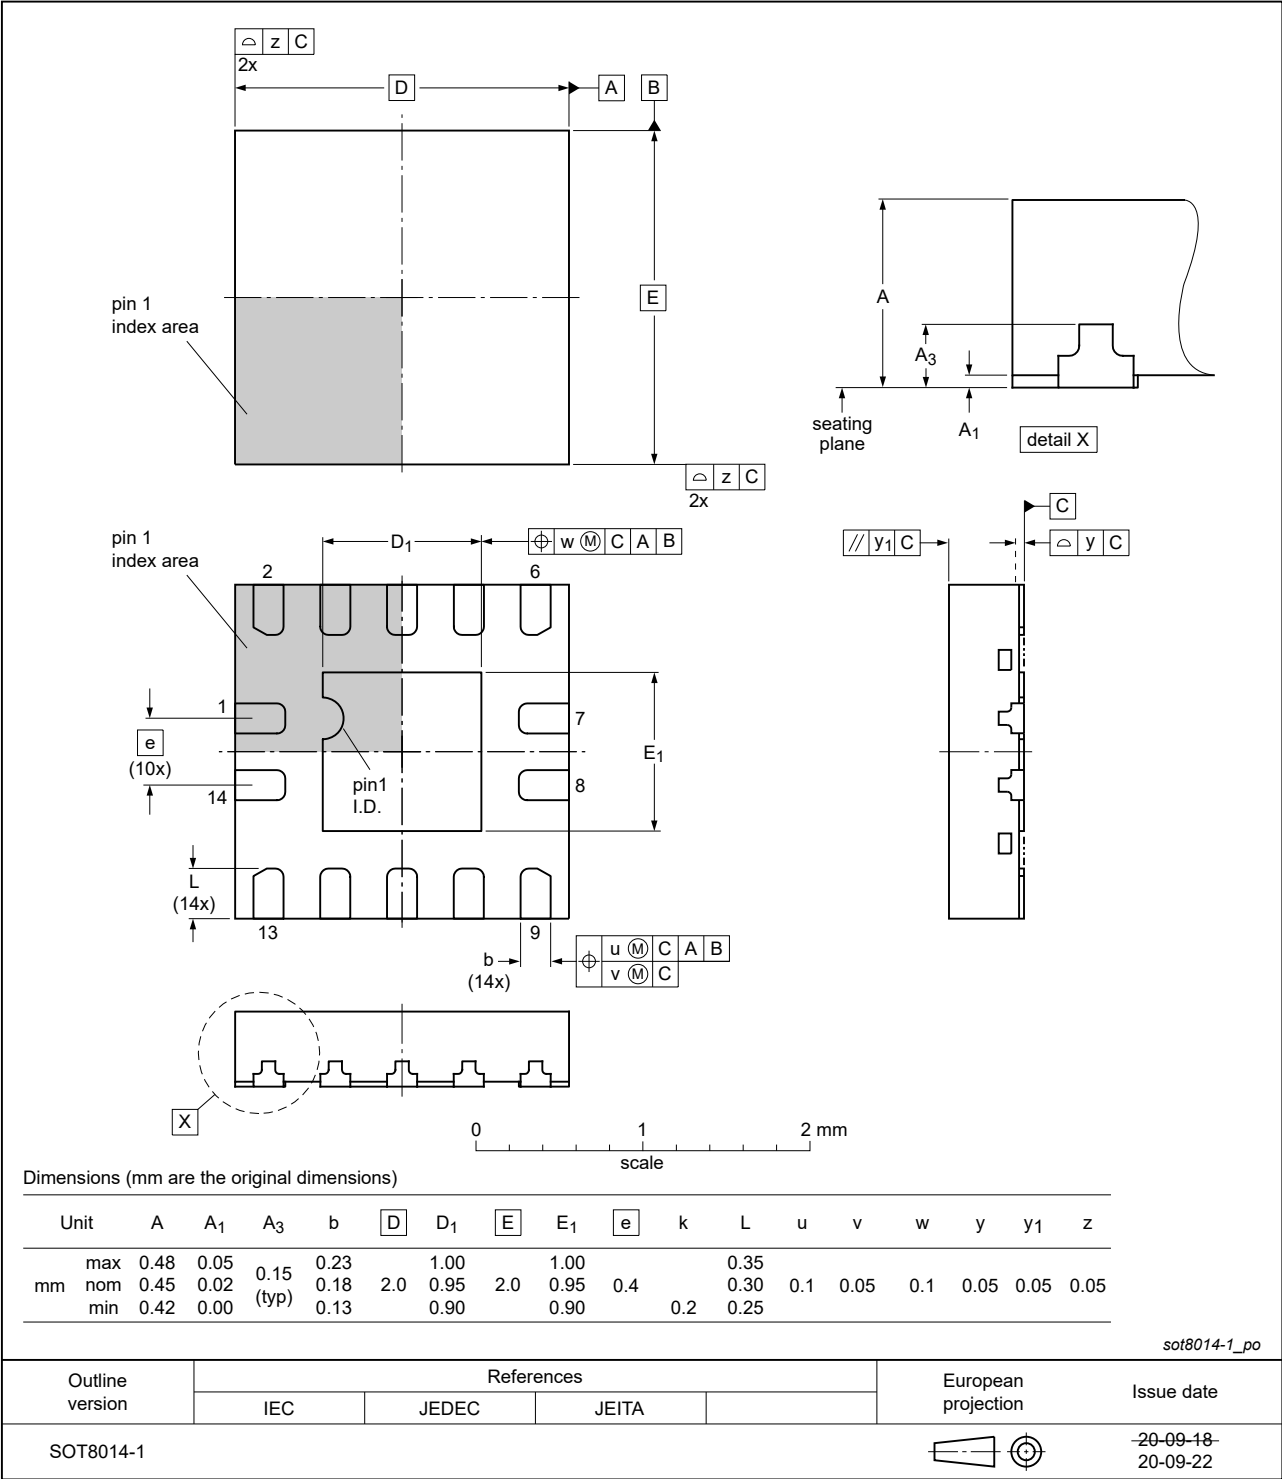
Package outline SOT8014-1 (DHXQFN14)
